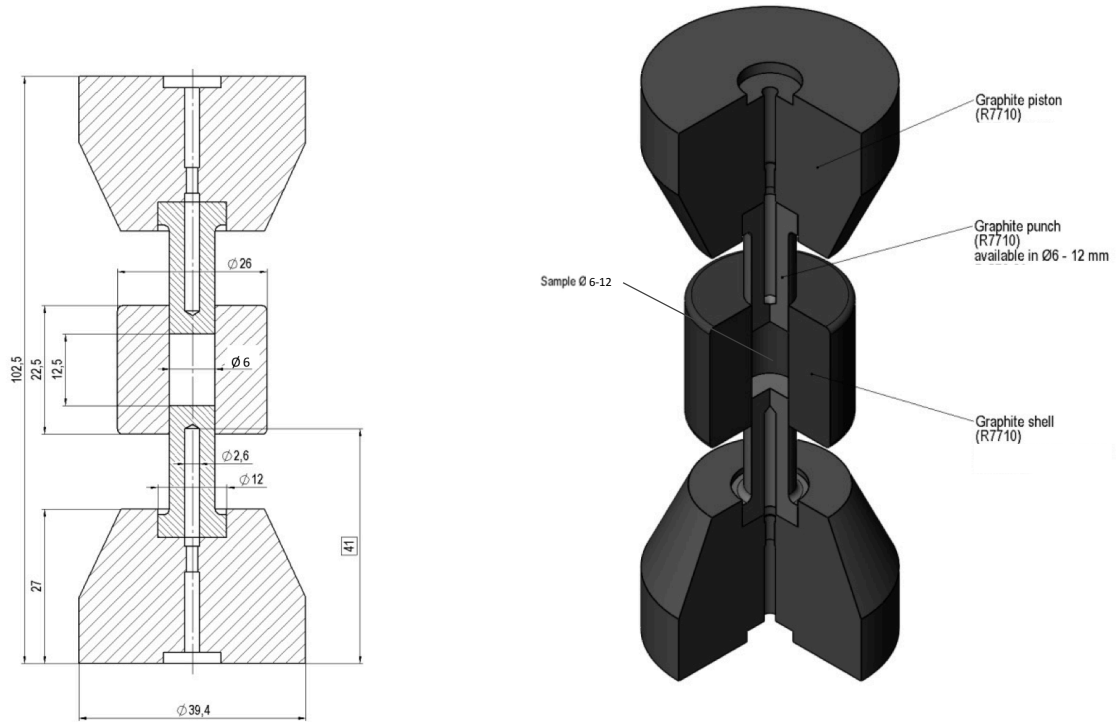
Technical drawing of the standard SPS set-up used for reactive-sintering on UO_2 and C mixture and for the sintering of uranium carbide.
